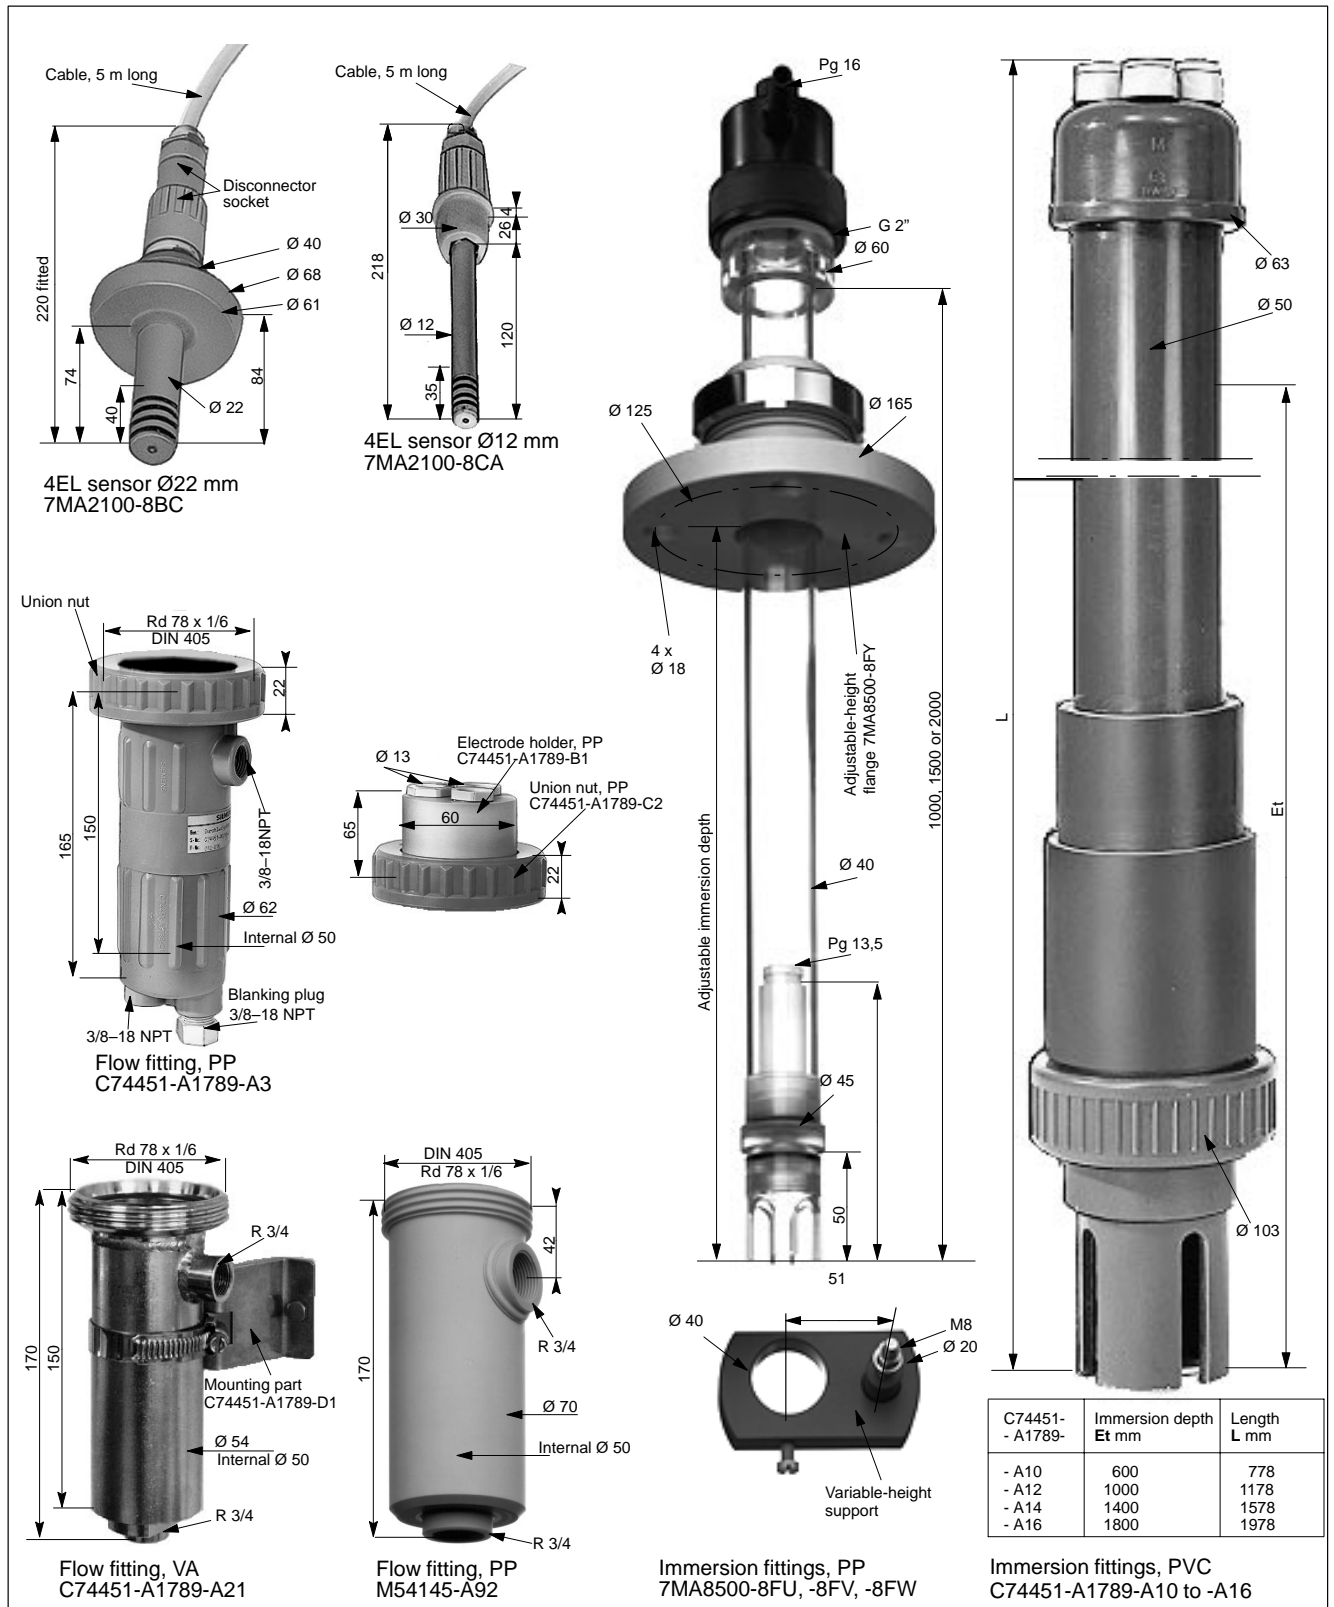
/23 4EL sensors, fittings and accessories, dimensions in mm
